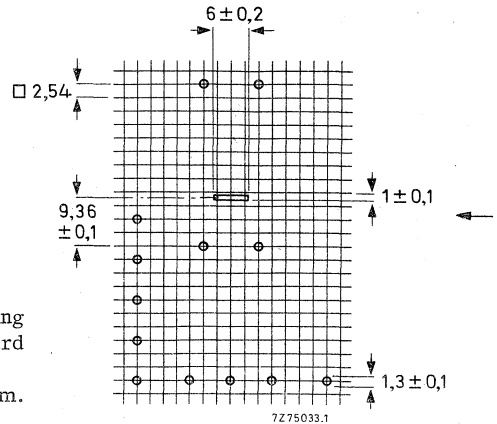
Hole pattern for mounting on a printed-wiring board (solder side).
